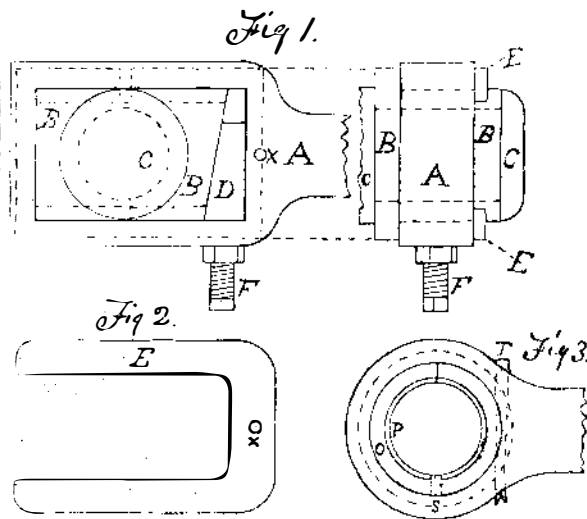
shows a good substantial form for the ends of parallel rods; the outer ring, O, must be large enough to let the collar of the wrist pass easily through the eye in the rod; the ring, P, is simply a lining of hard composition, to take the wear of the wrist and to be renewed occasionally when worn out; the outer ring being secured by a taper pin, T, split at its lower end as shown. The inner ring is kept from turning by a dowel, S. Therings, being in halves, may be first placed upon the wrist, and then the rod slipped upon them, as explained above.
